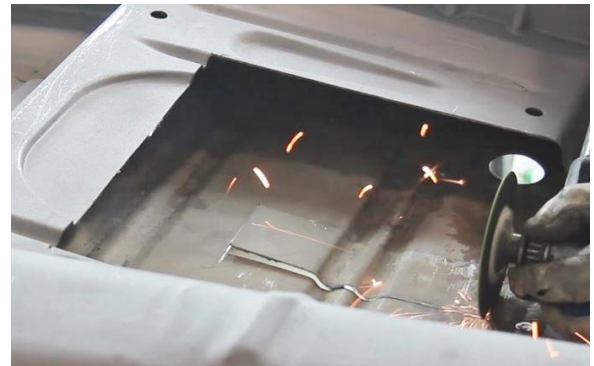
Cut Floor Pan Front Frame Rail Doubler Installation
